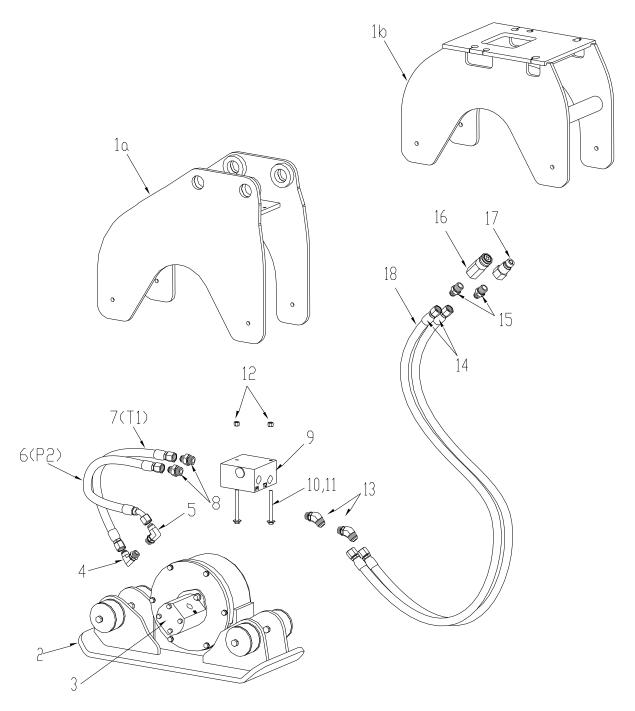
Model 500B Mounting Frame & Hydraulics
